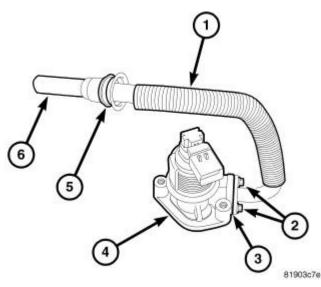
EGR SOLENOID/TUBE ASSEMBLY Courtesy of CHRYSLER LLC
